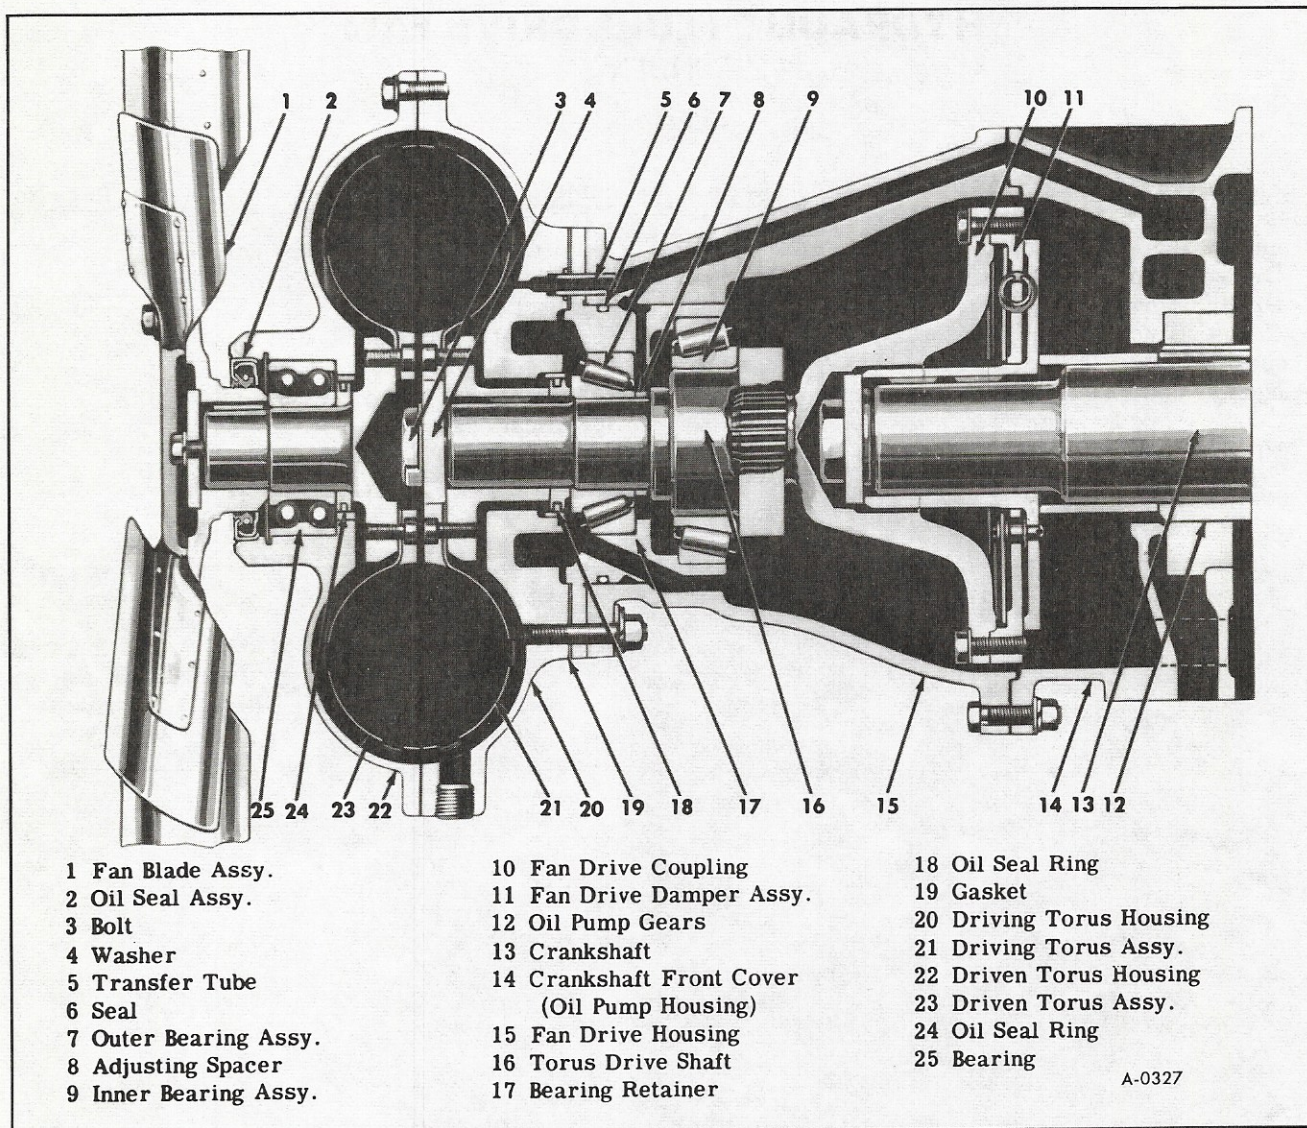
Cross-Sectional View of Fluid Fan Drive (Typical)
